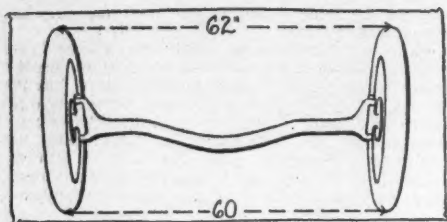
FRONT VIEW OF SPREAD WHEELS
